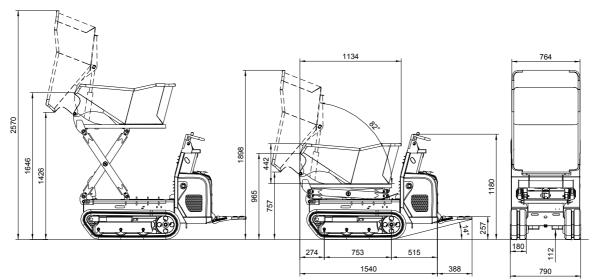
Machine dimensions (model DT08-P with high-tip skip)
